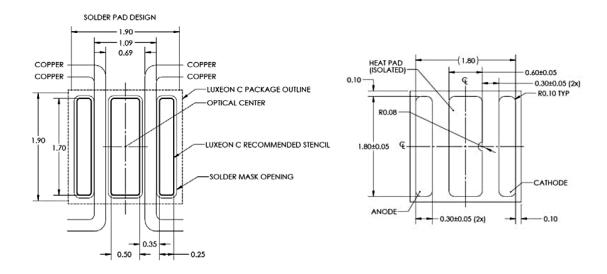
Recommended PCB solder pad layout for LUXEON C Color Line.
